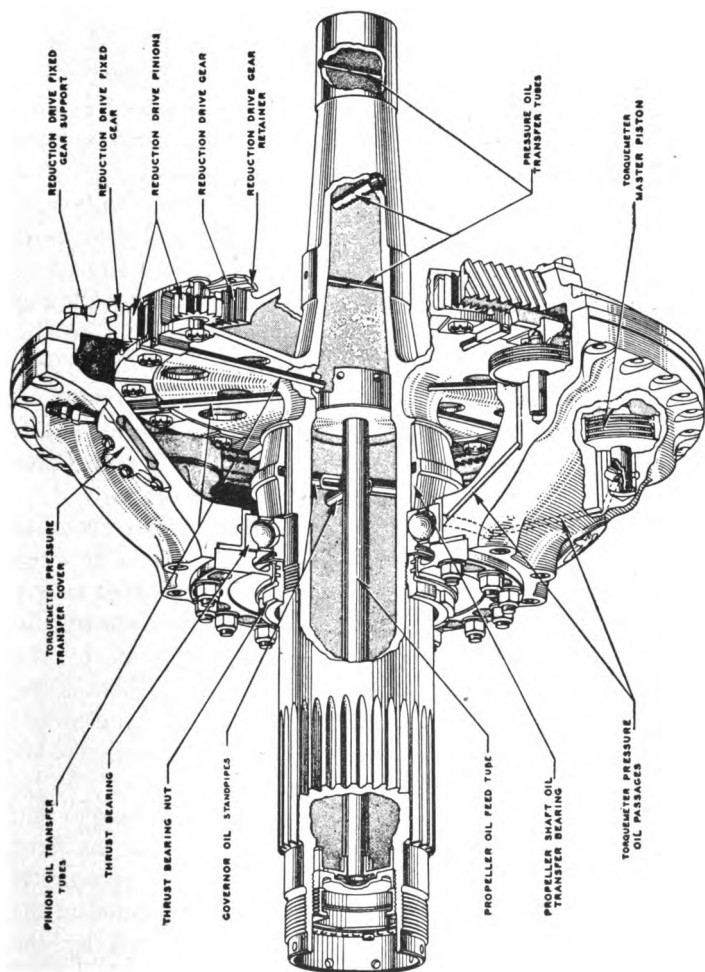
Cutaway view of front section (20:9 reduction gearing).
